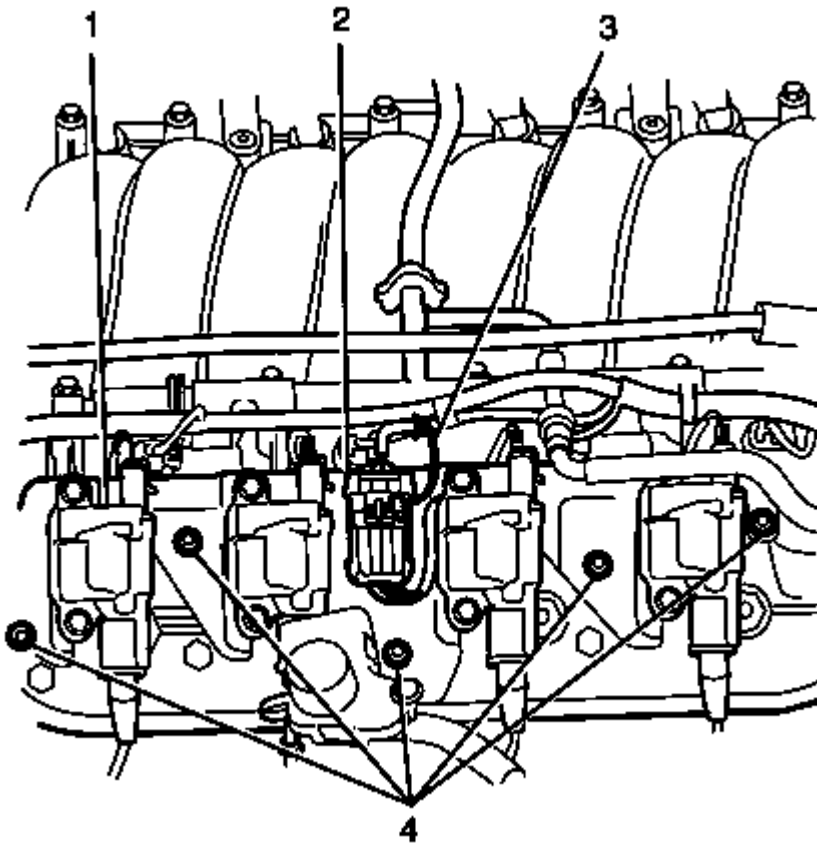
Identifying Ignition Coil Assembly To Valve Rocker Arm Cover Retaining Studs (Left Side)
